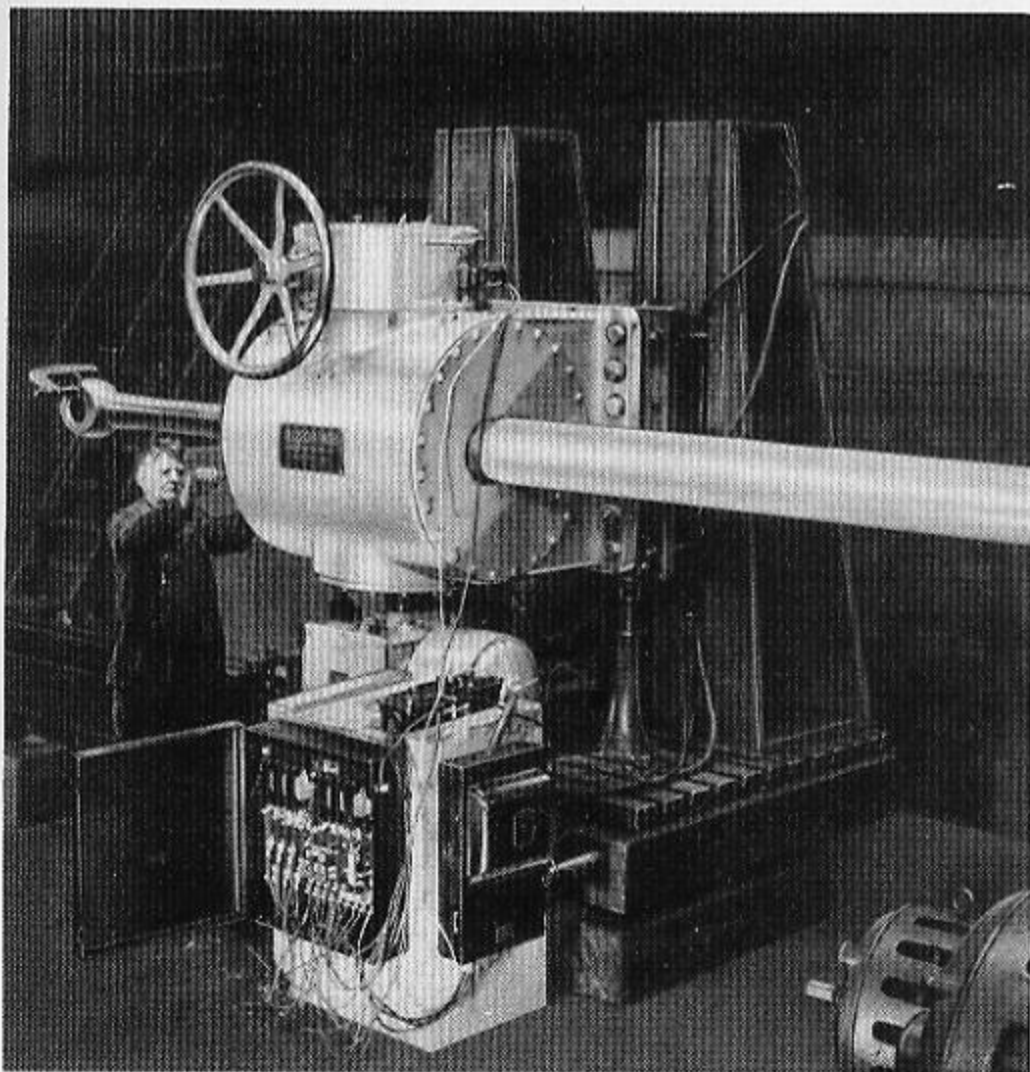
Operating mechanism with torque motor and control equipment for controlling 15 ft diameter butterfly valves.
